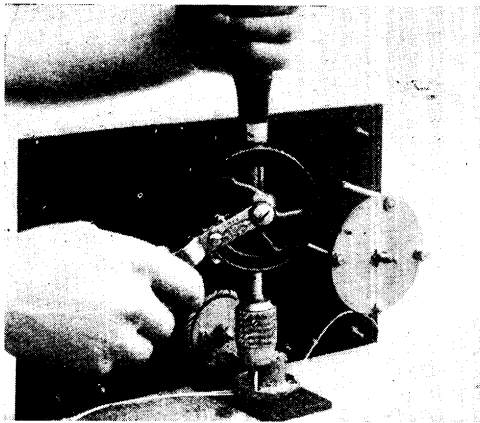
One screw should be fixed first and the holes for the others drilled afterwards, to ensure alignment when the valve holder is fitted
